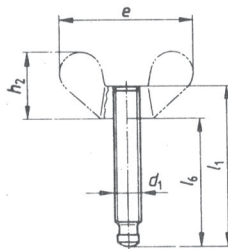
Clamping screw with DIN 315 wing nut for sizes M 6 to M 10
